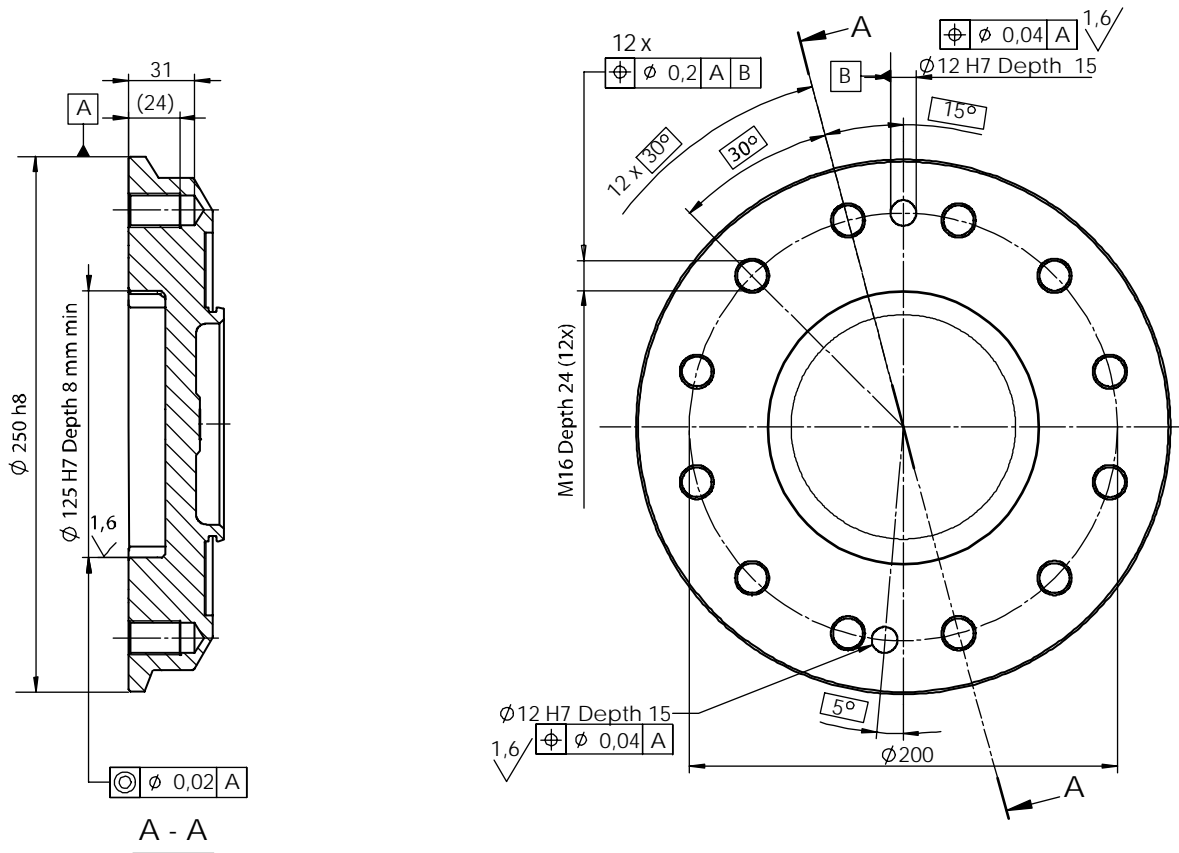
The mechanical interface; mounting flange (dimensions in mm).
